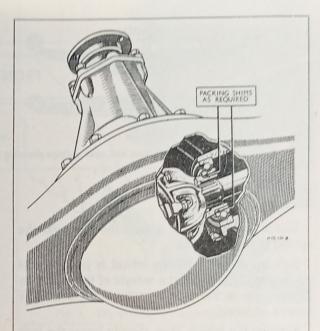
In order to provide means for adjusting the mesh of the crown wheel and bevel pinion and for adjusting the pre-load and the differential ball bearings, shims may be fitted as shown above.
